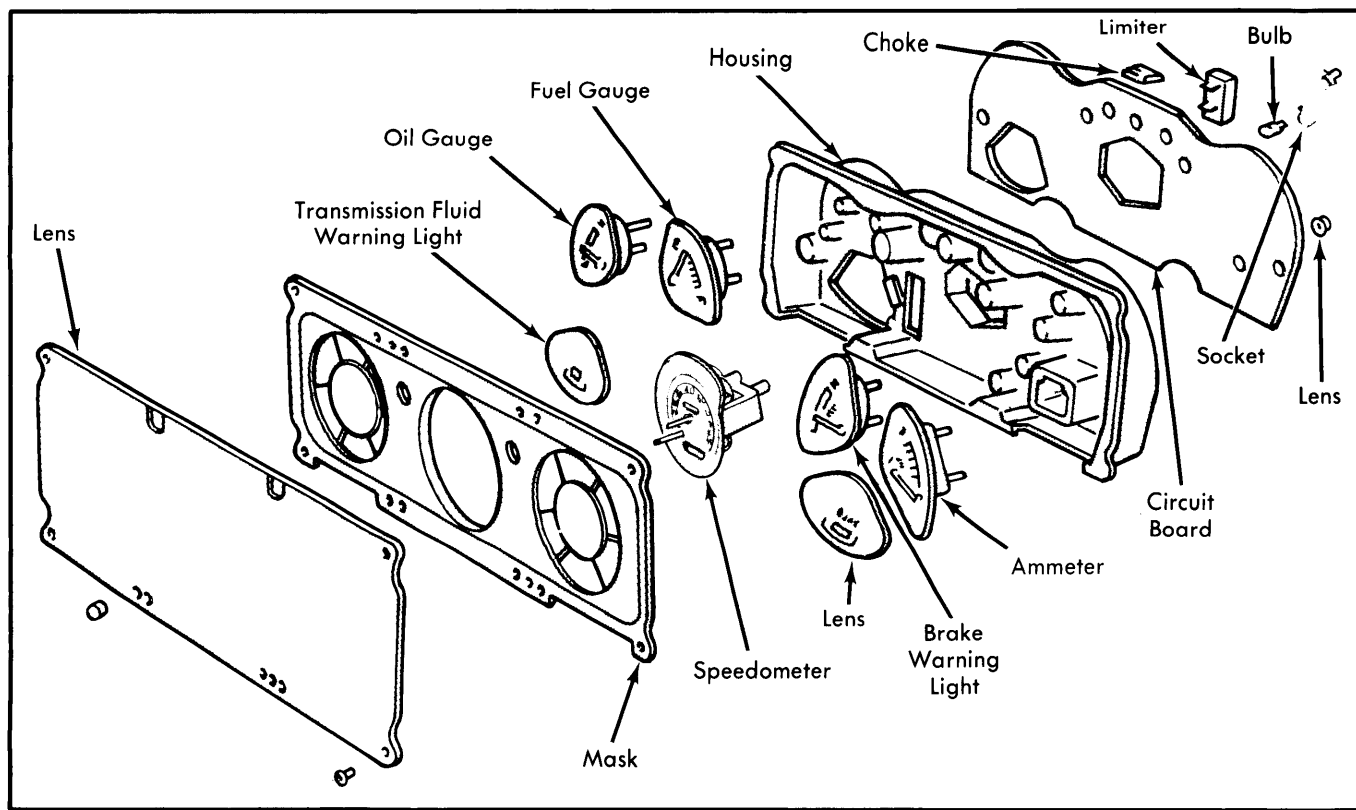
Exploded View of Chrysler Motor Home Instrument Panel
